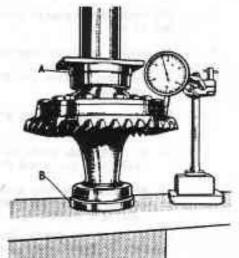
CHECKING CROWN WHEEL RUN-OUT.
